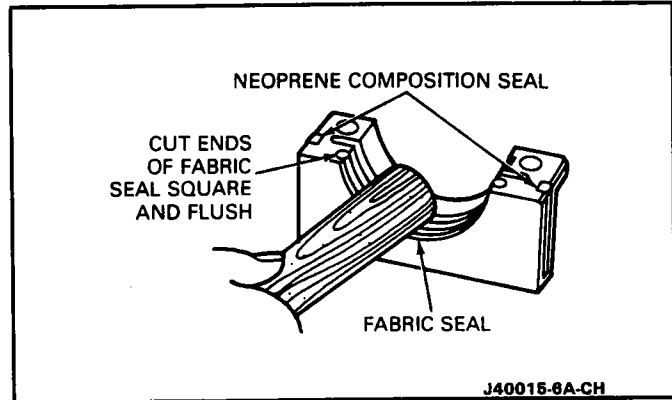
Installing Rear Main Bearing Oil Seals 3.0 and 3.8L)
